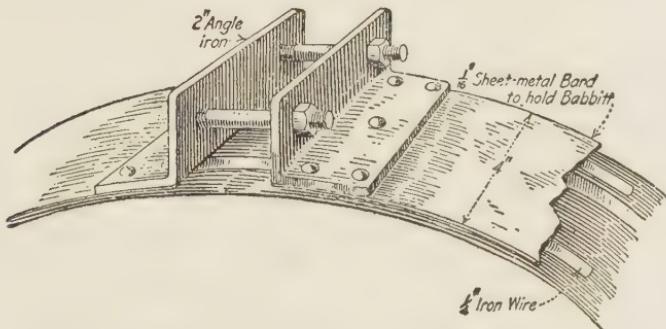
SHEET-IRON BAND FOR BABBITTING BULL-RING
